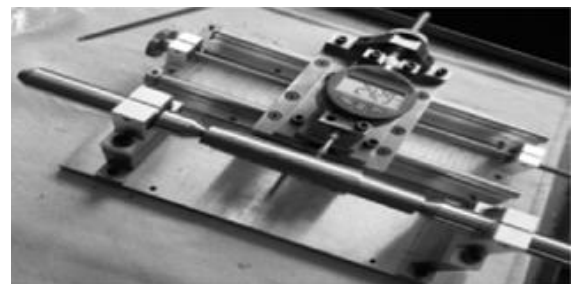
Precision tapered workpiece measuring tool unit being calibrate for tapered specimen.
